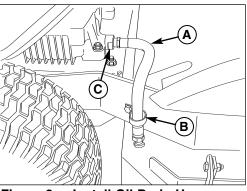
Install Oil Drain HoseA.Drain HoseB.Clamp (mounted in top hole)C.Clamp (mounted in top hole)
